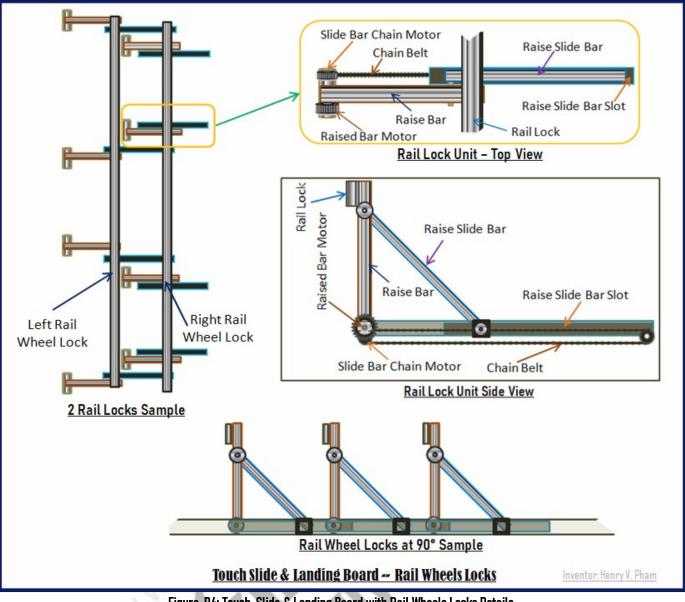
Touch-Slide & Landing Board with Rail Wheels Locks Details
